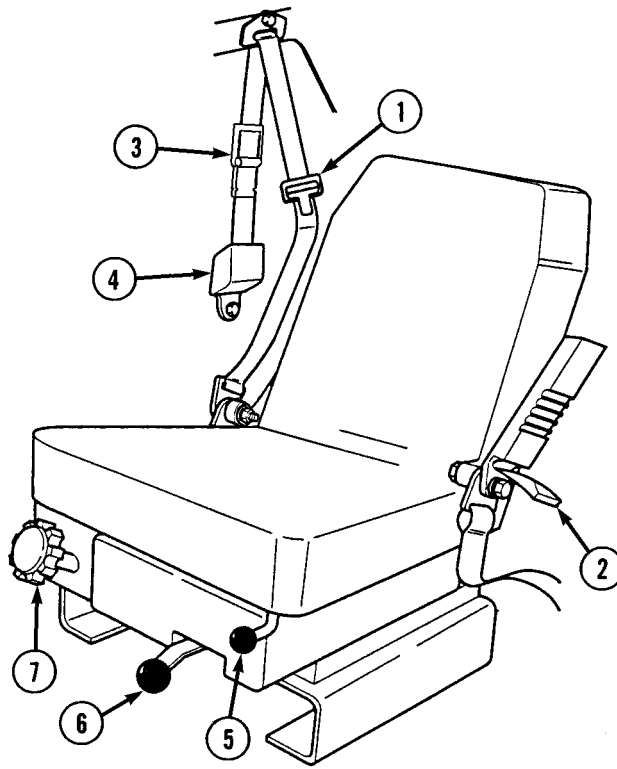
Operator and Crew Three-Point Seatbelt/Seat Adjustment.
